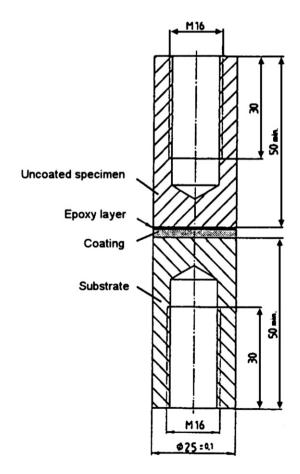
Assembly of an EN 582 tensile adhesive test specimen [4].
